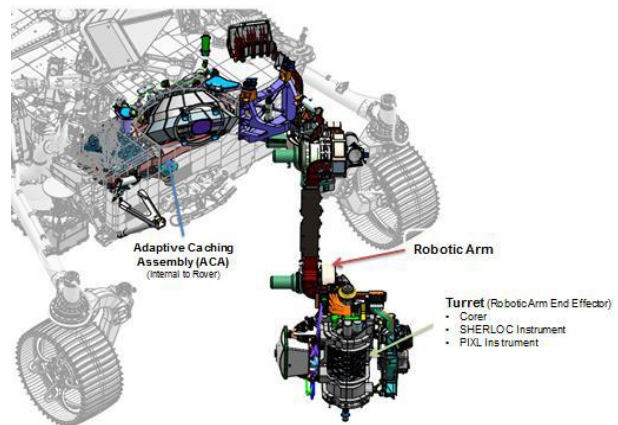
Mars 2020 Adaptive Caching Assembly (ACA), robotic arm and turret
